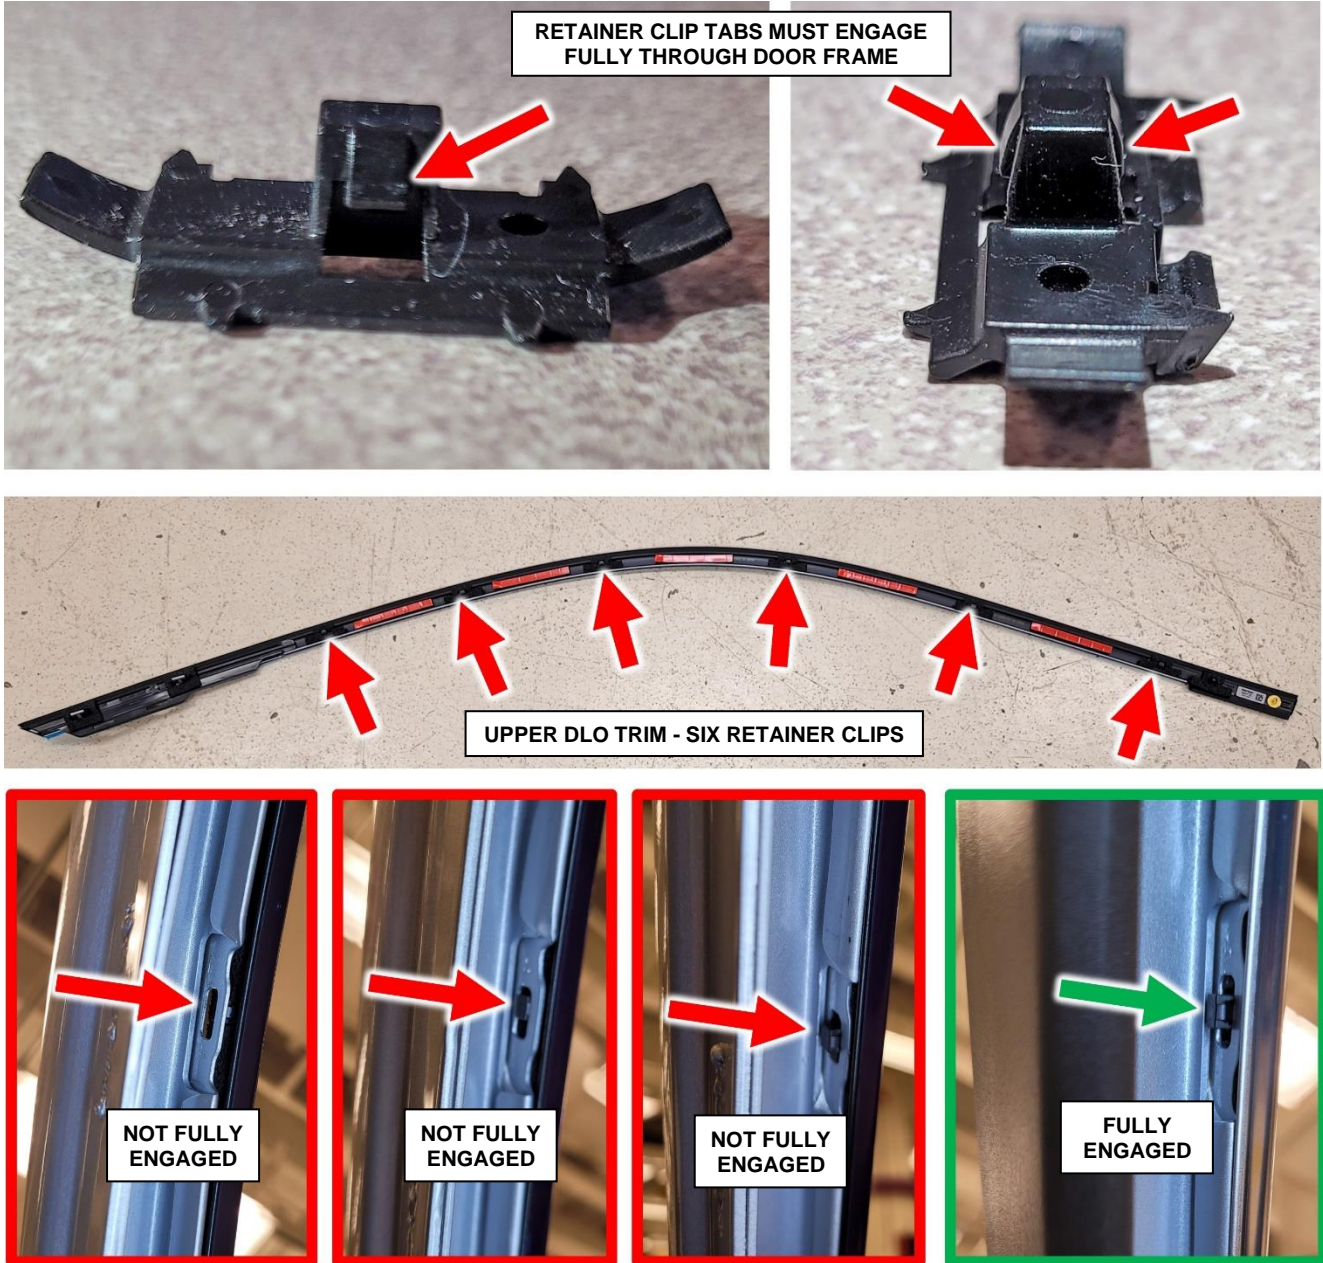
Upper DLO Trim Retaining Clip Engagement Inspection
